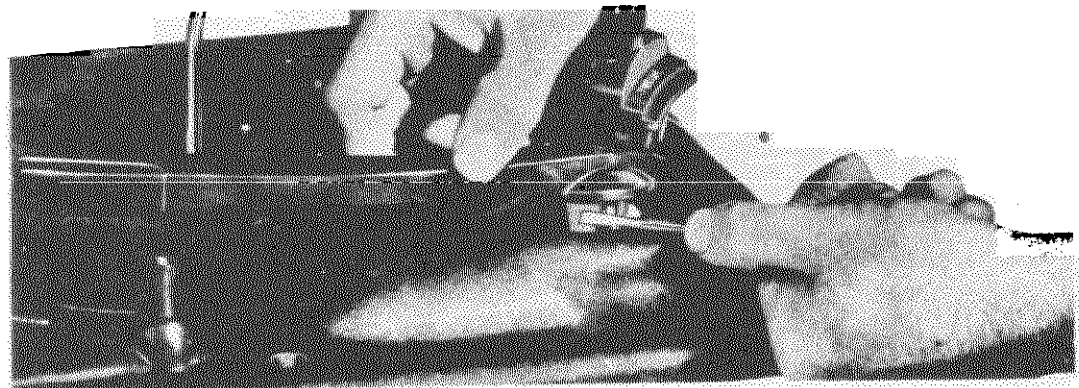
REMOVING PICKUP ARM ASSEMBLY
